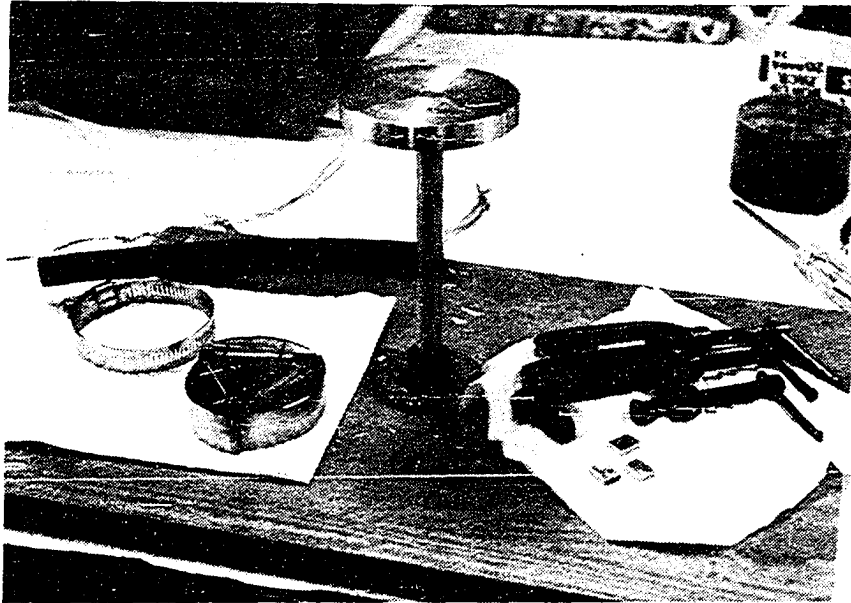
Four-piece holder for polishing edges of flat weights, with upper spacing pieces, mounting plate, temporary clamps, and clamping ring
